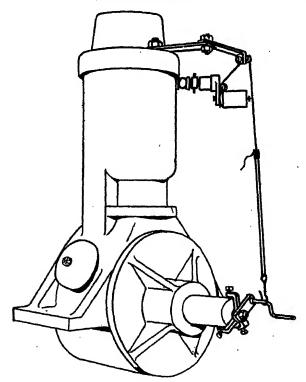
Indicator Gear Crank Clamped to Crank Shaft.
